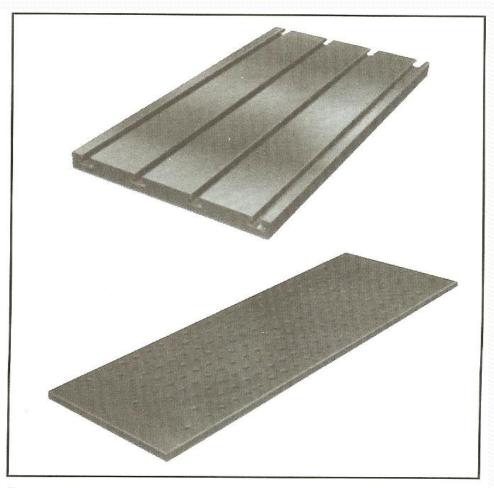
Subplates. (Courtesy Mid-State Machine Products)
